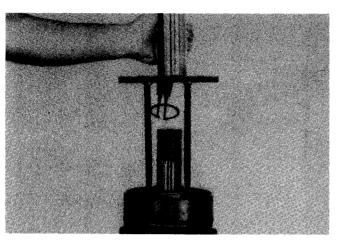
Compress piston return spring. Remove return spring retainer ring.
